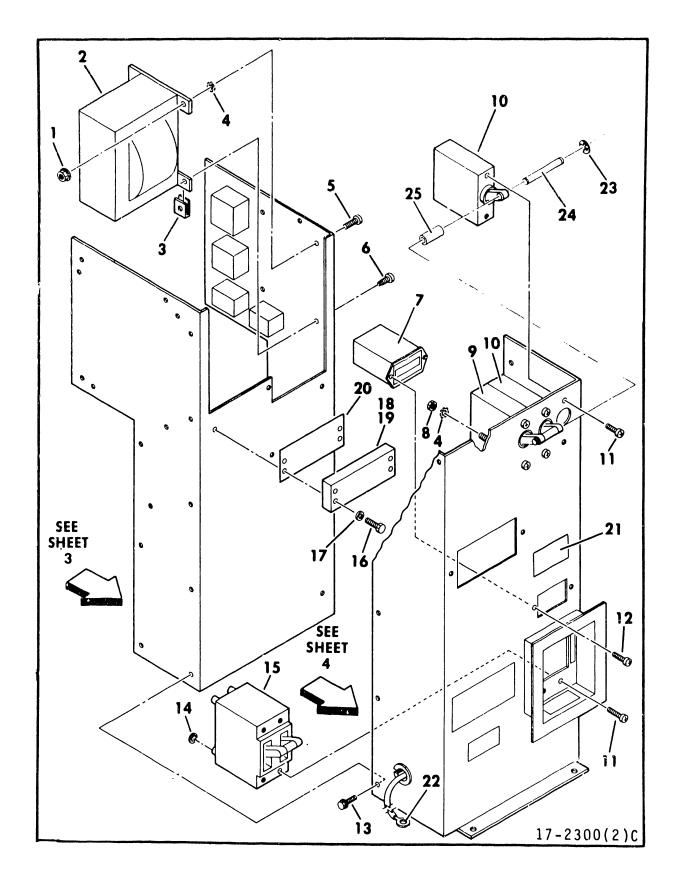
A-23. AC Power Supply Assembly (Sheet 2) 83323560 H
